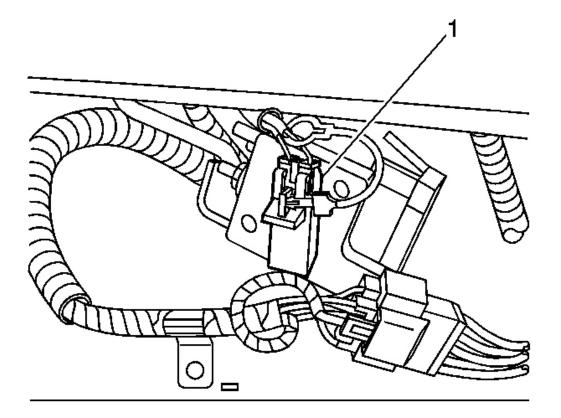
Identifying CPA Clip Courtesy of GENERAL MOTORS CORP.
